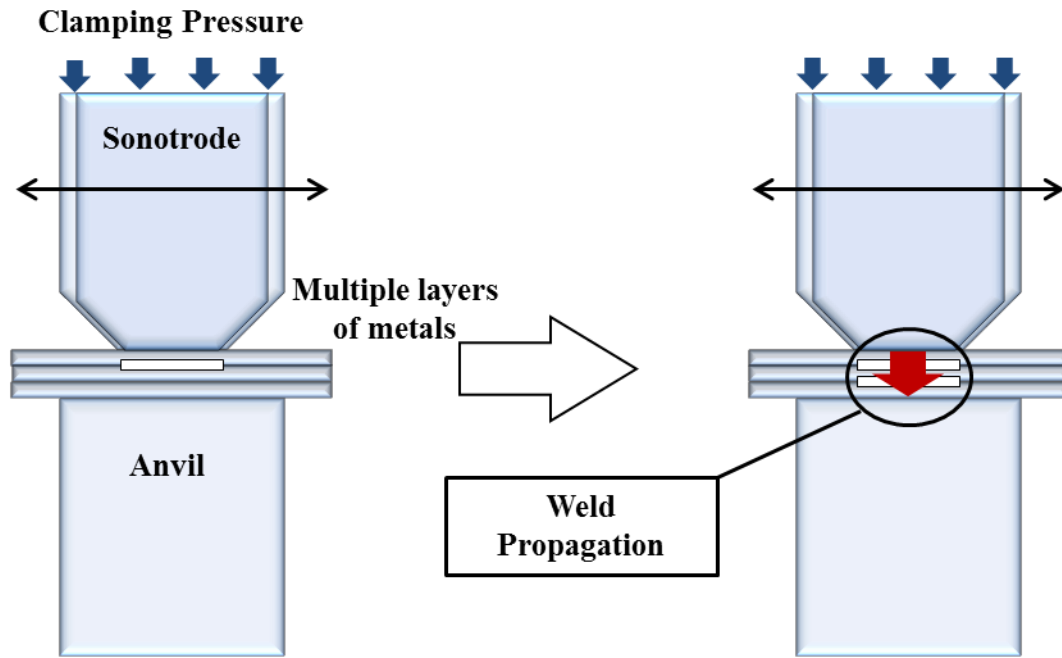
Weld propagation during ultrasonic welding process
